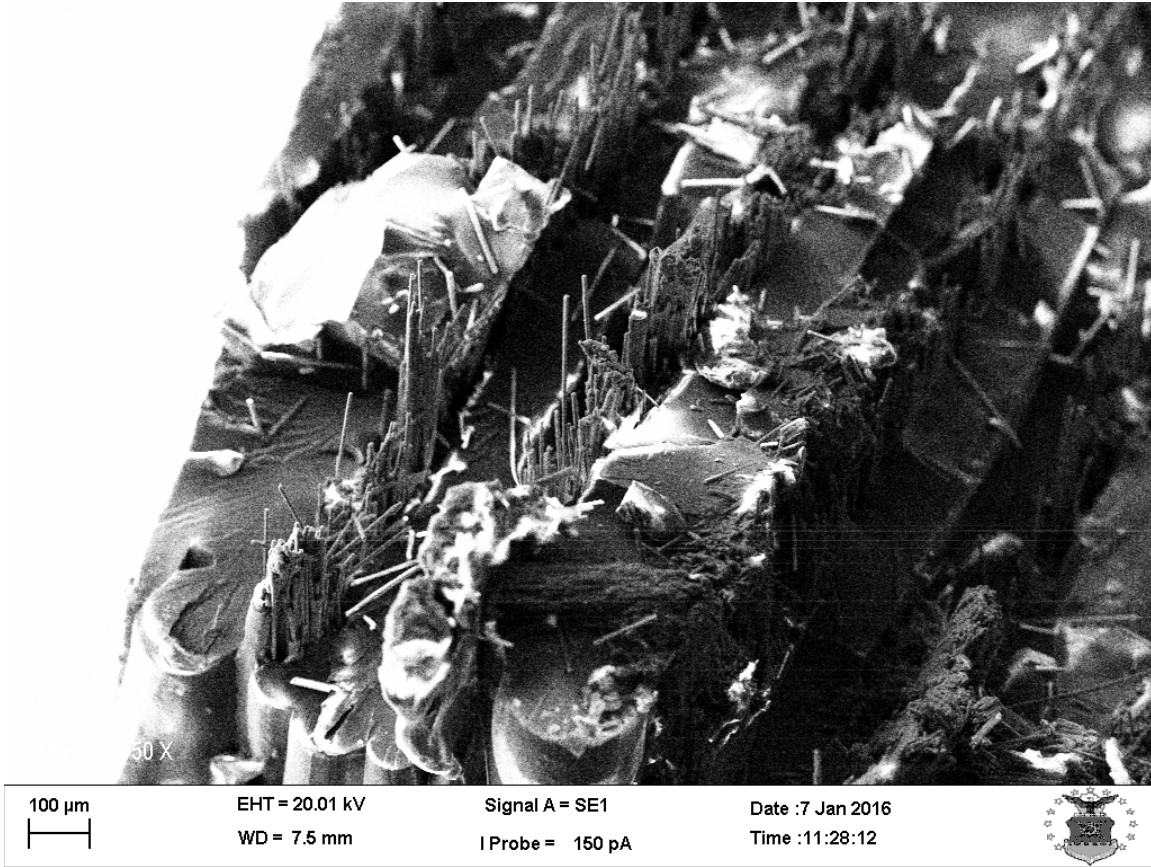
Fracture Surface of Continuous Carbon Fiber Nylon Composite Focusing on Carbon Fibers Between Nylon Layers
